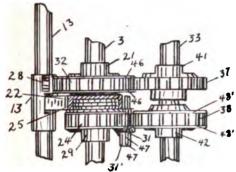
, Harrison Change Gear. Menges' shrouded gear engagement retention. 13, Round shifter guide. 46, 46, 47, 48, and 49, gear teeth shrouls by which the cugagement of coacting pairs of gears is maintained while the cuacting gear pair is moved axially by pressure applied to the gear hub of one gear only of the
